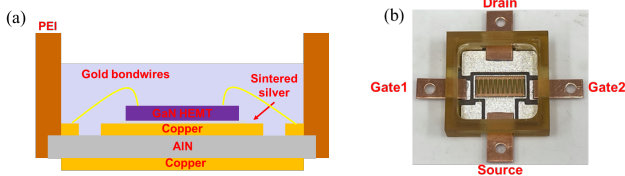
(a) Schematic of the package cross-section; and (b) top view of a completed eGaN package.
